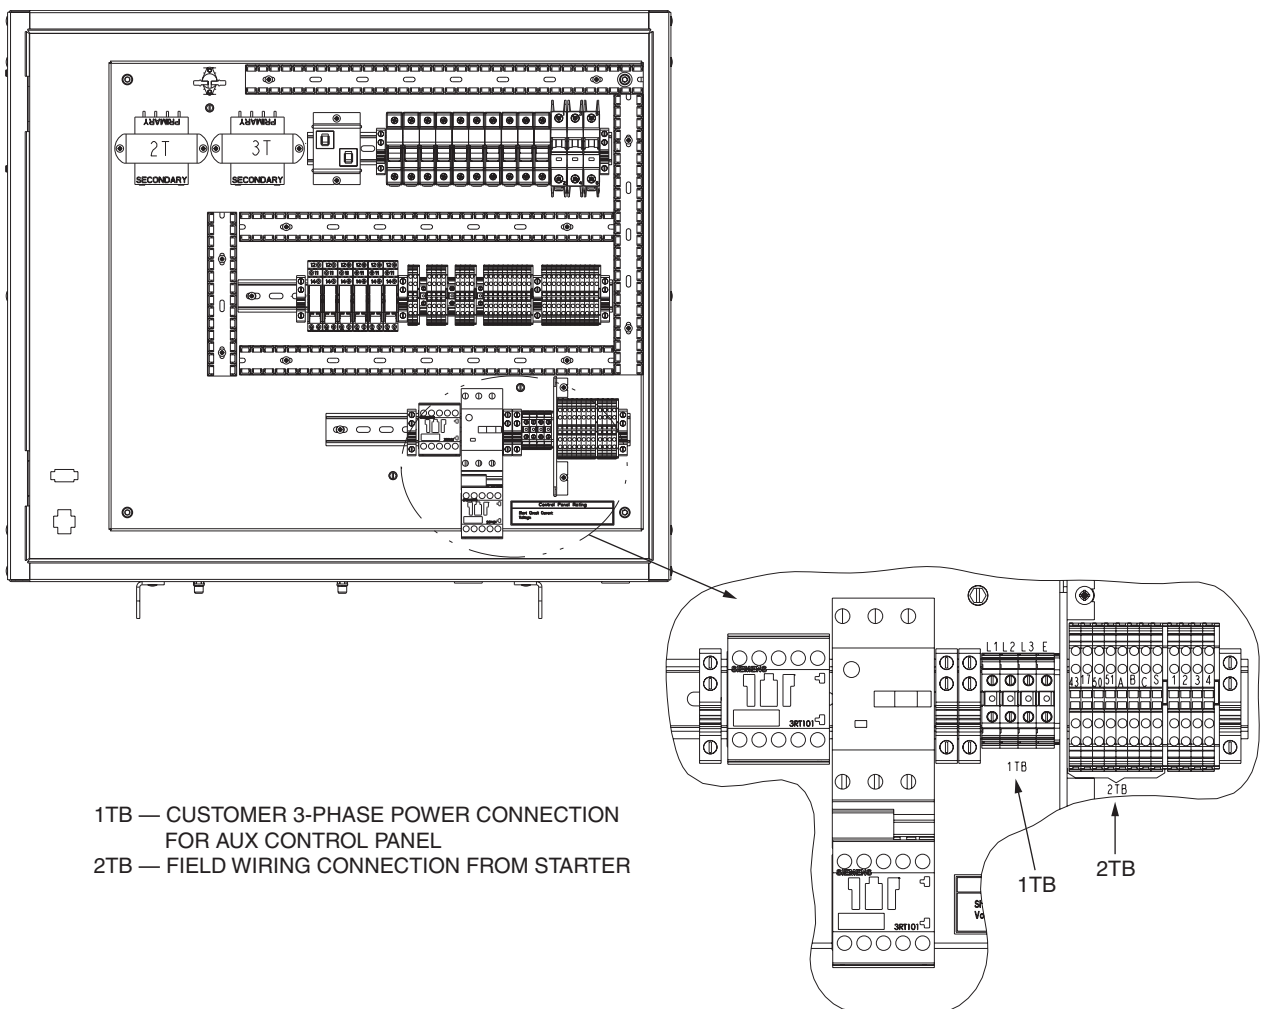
Auxiliary Control Panel, Bottom Layer
